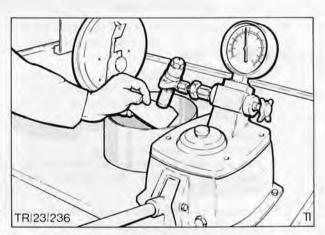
Checking injector for leakage by using a piece of absorbent paper
